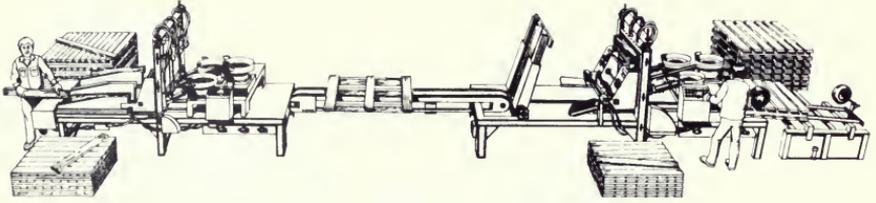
Mechanized pallet assembly line incorporating two nailers, for manufacture of pallets 24 to 60 inches in length and 26 to 50 inches in width. (Drawing from Viking Engineering and Development Incorporated.)
